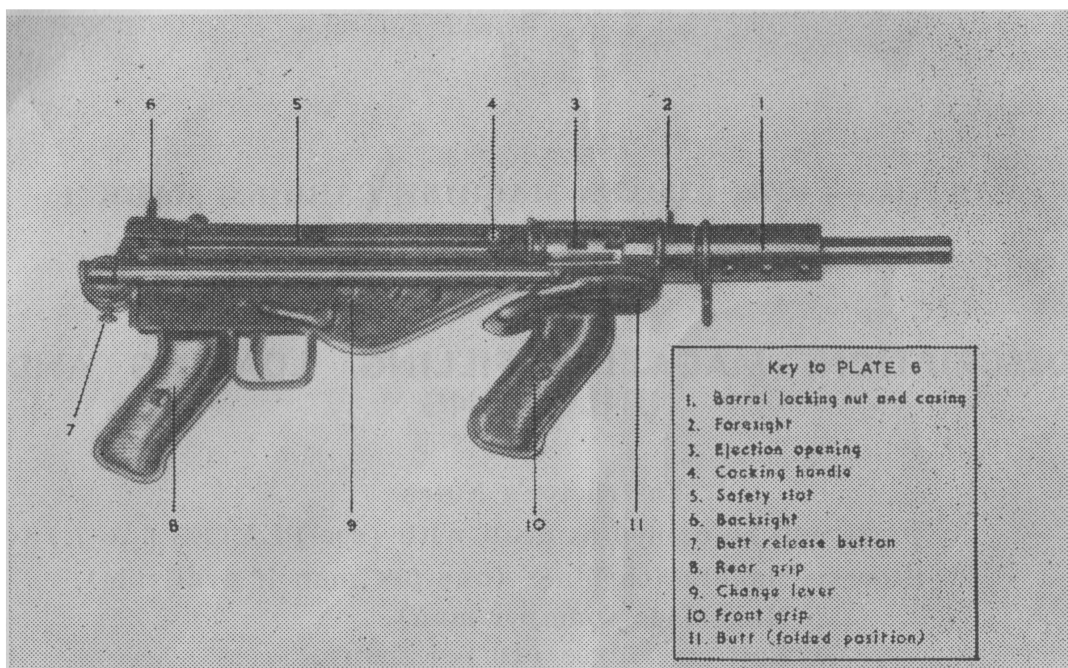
Austen Machine Carbine Mark 1 (Right Side).
